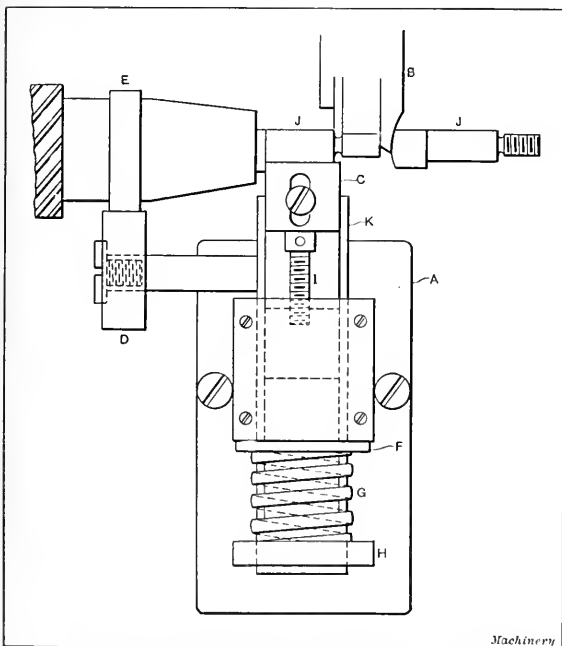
Fixture for making Eccentric Screws on the Cleveland Automatic Screw Machine
